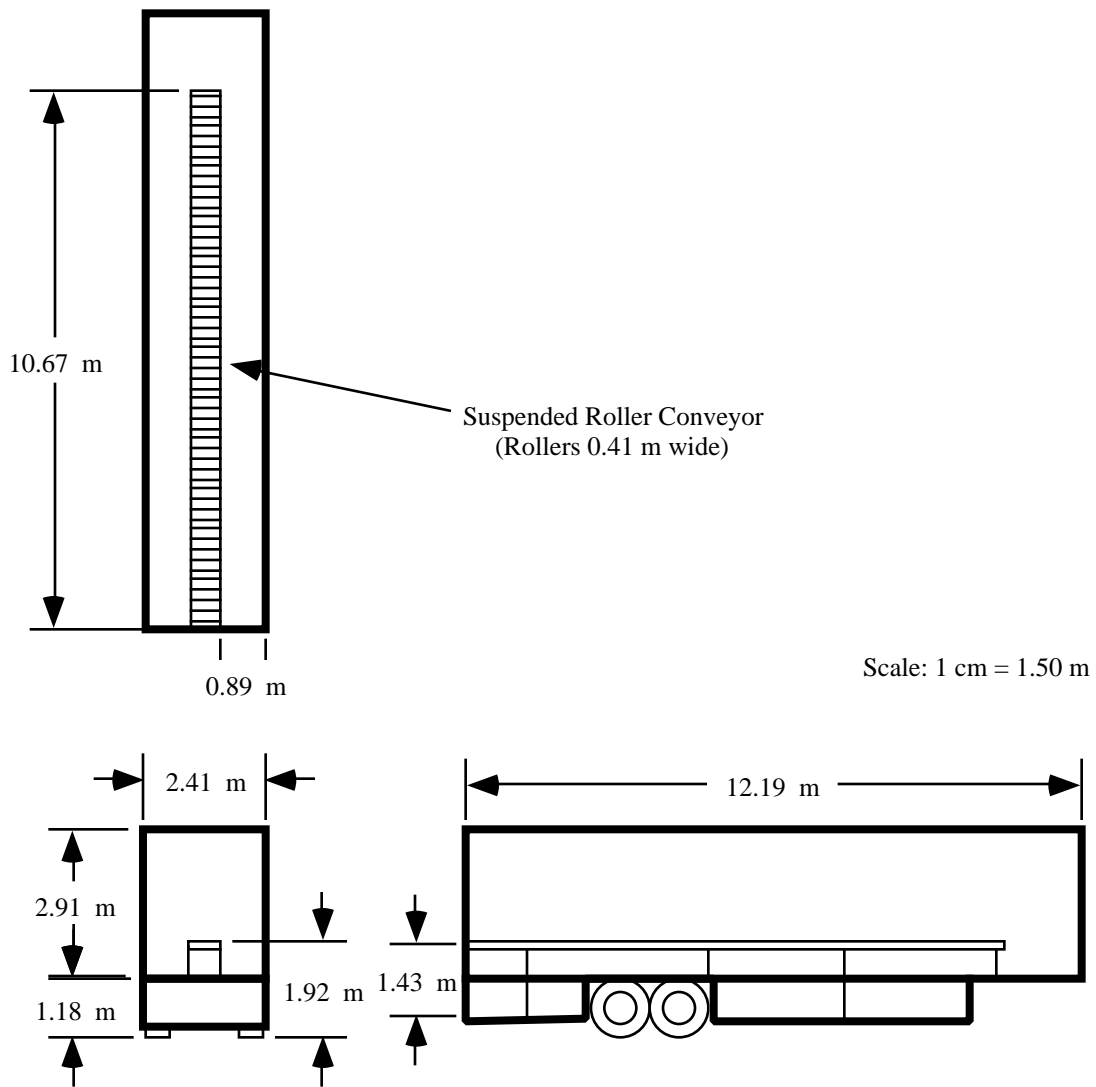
Drop-frame trailer with suspended roller conveyor - drawing.
